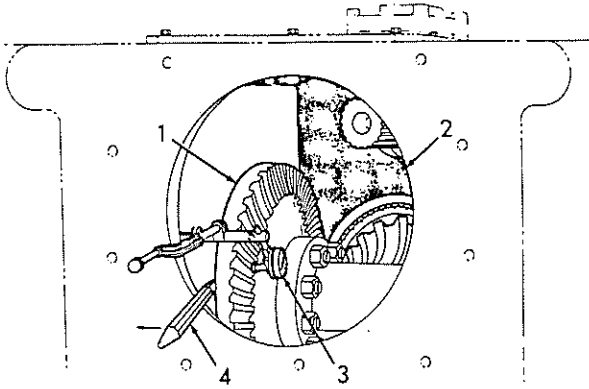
Checking for Bevel Gear End-Play (T-70854)
